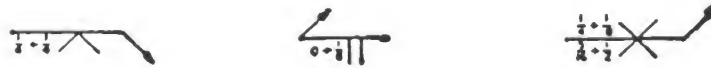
Combined intermittent and continuous welding.
